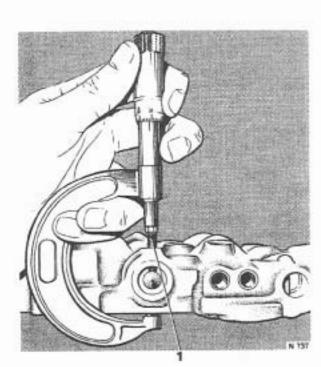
MEASURING THE ADJUSTING SCREW (EARLY CARS)
